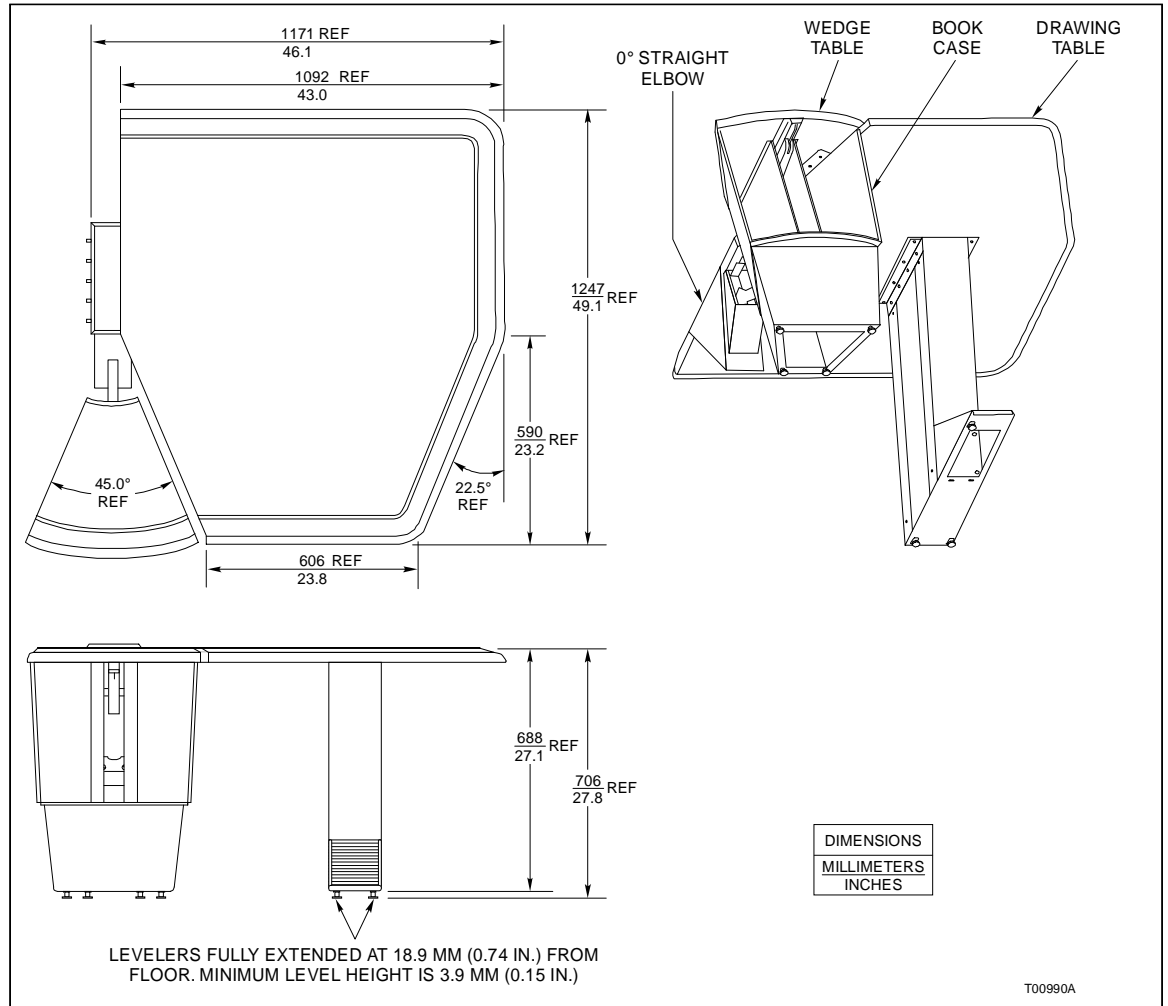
Drawing Table with Bookcase and Wedge Table Dimensions
